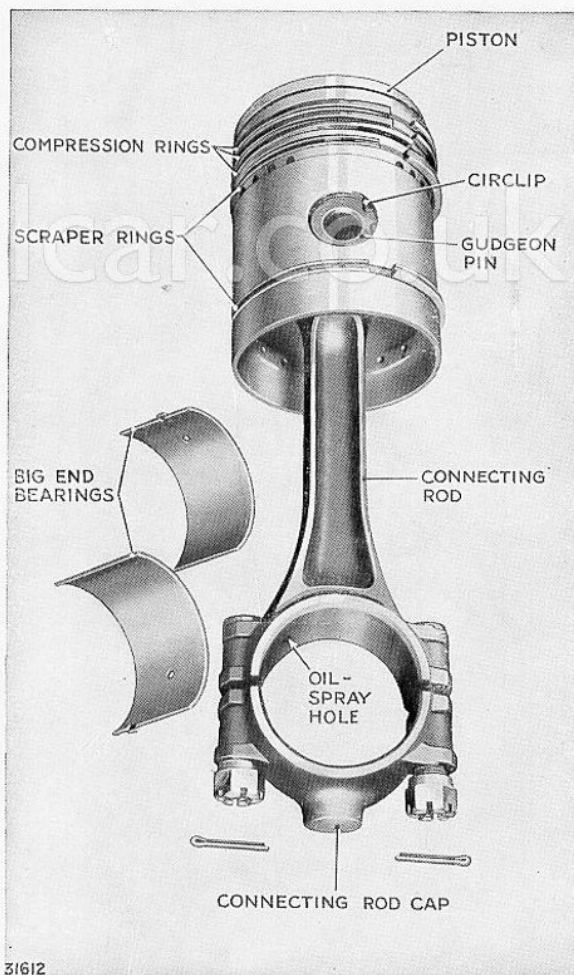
TYPICAL ILLUSTRATION OF PISTON AND CONNECTING ROD
